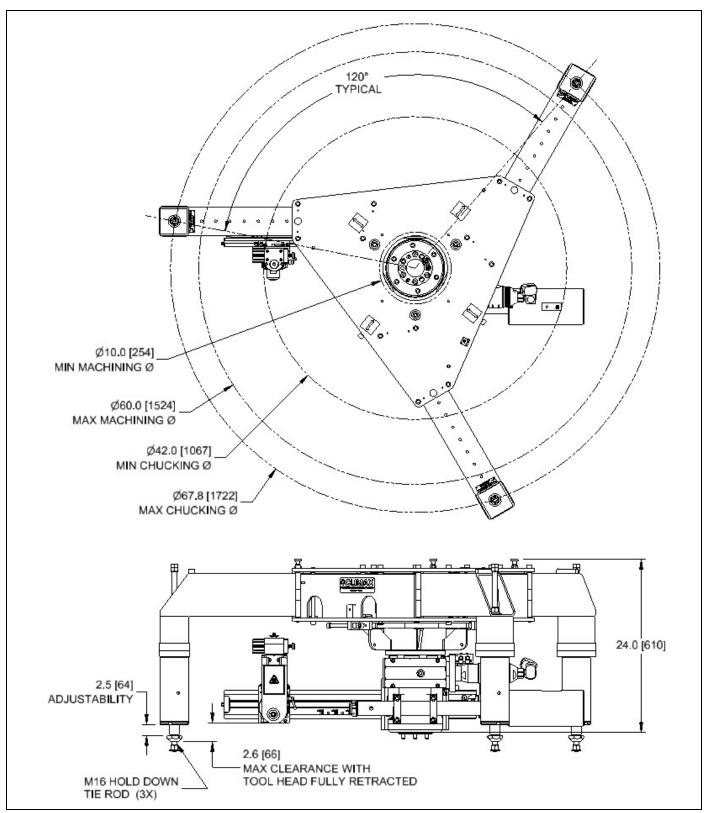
OD MOUNT ASSEMBLY DIMENSIONS
